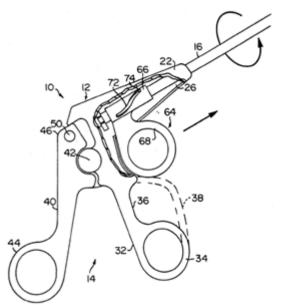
One-handed rotating tube endoscopic surgical device⁹.
